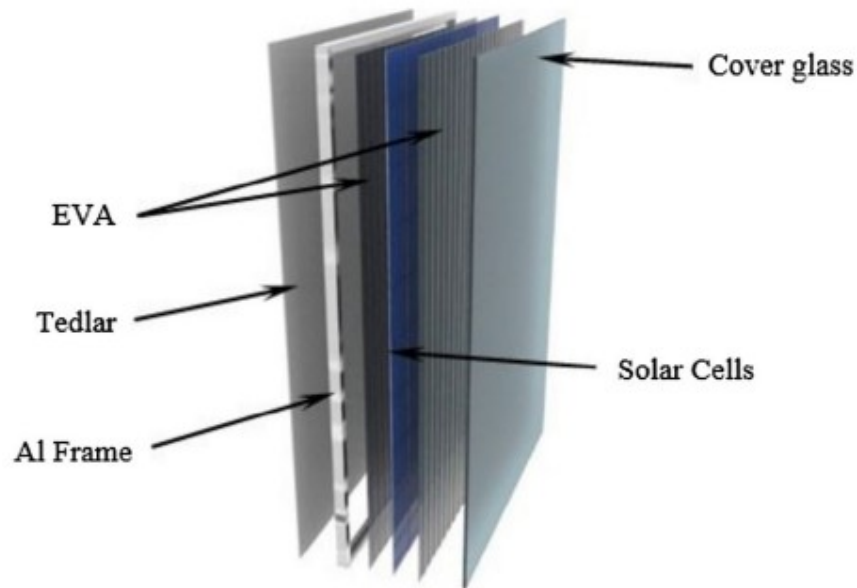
Exploded view of a typical c-Si panel [4]
